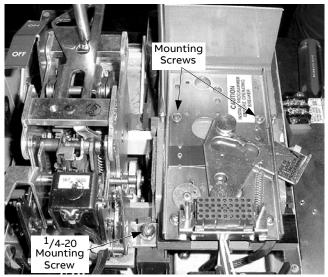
Trip unit mounting plate on an 800–2000 A breaker.
